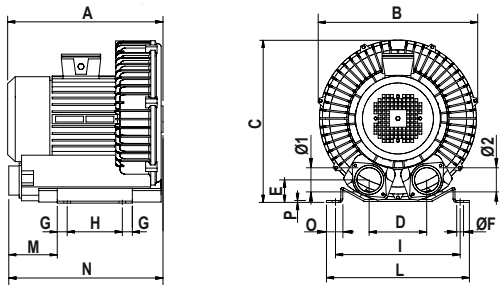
Double STAGE - Double CHANNEL - Double IMPELLER
